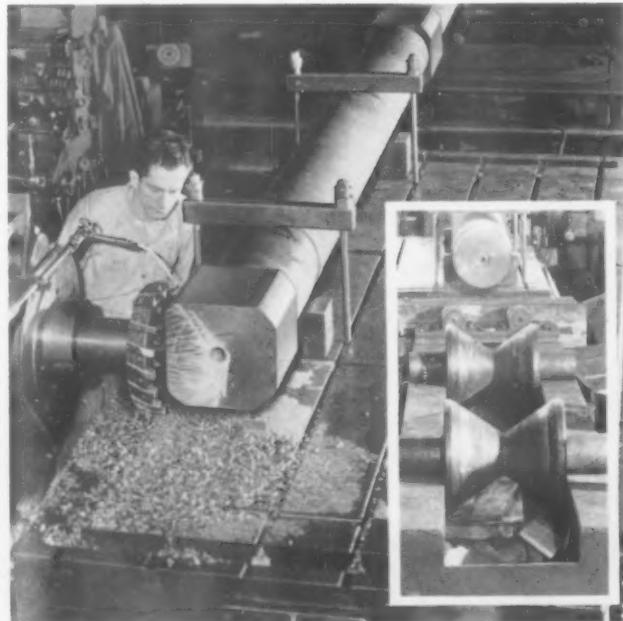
Square-milling a large-diameter drag line shaft on a horizontal boring mill. Lateral work extension, at right angles to the machine spindle, is limited to the amount of floor space available. Overhanging end-weight of the shaft is carried on Vee rollers, shown in inset, to prevent deflection.
